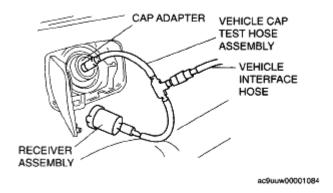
Identifying Cap Adapter And Receiver Assembly Courtesy of MAZDA MOTORS CORP.
